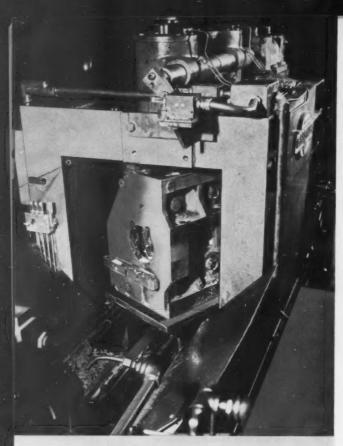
Fifth station of the automatic transfer machine seen in Fig. 4 is provided with a hydraulically actuated device for rotating fixtures 90 degrees.
